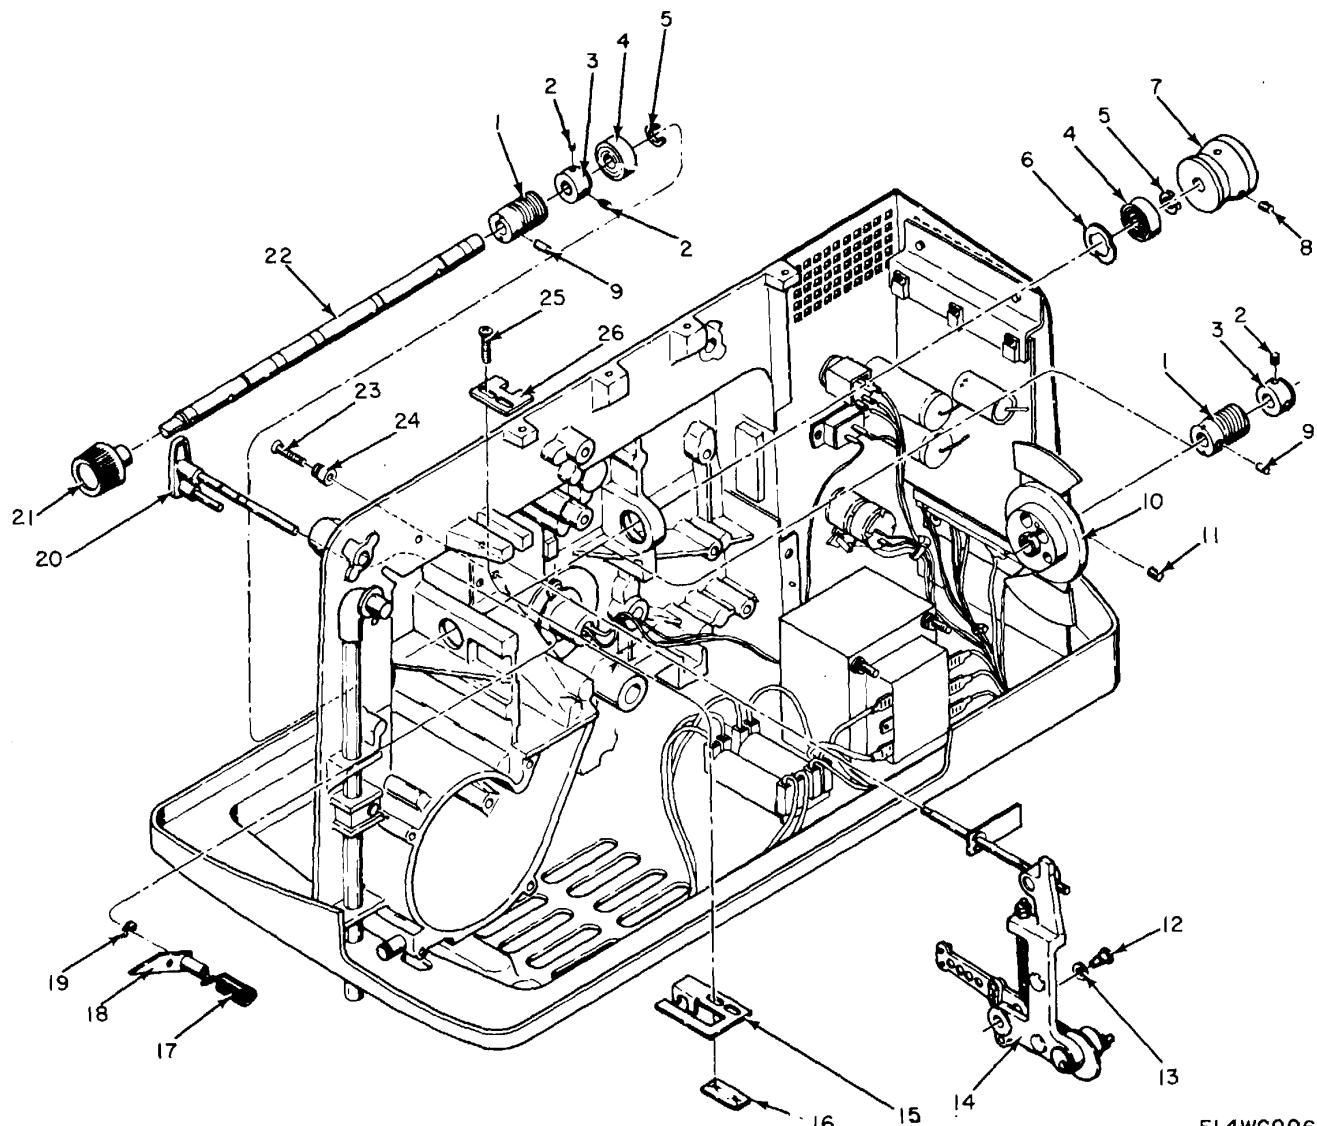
Projector AQ-9A1 Drive Shaft and Claw Arm Components
